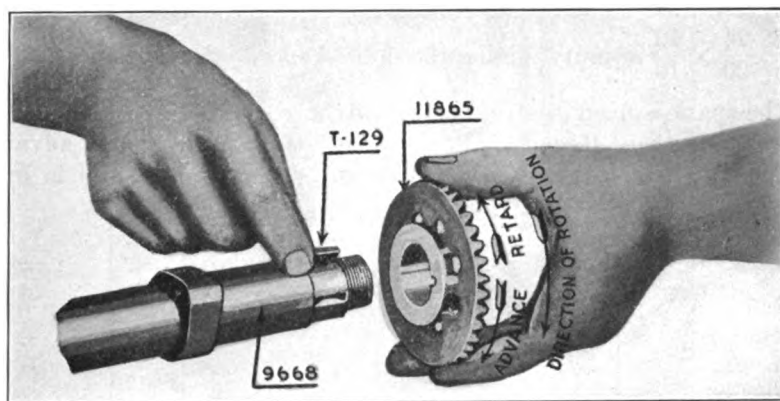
Adjusting gear on camshaft, models A, I and E.
